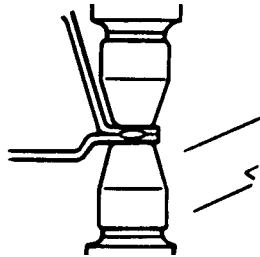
RESISTANCE-SPOT WELD
